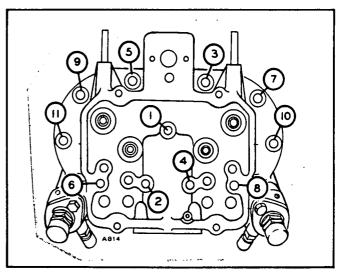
HEAD BOLT TIGHTENING SEQUENCE
